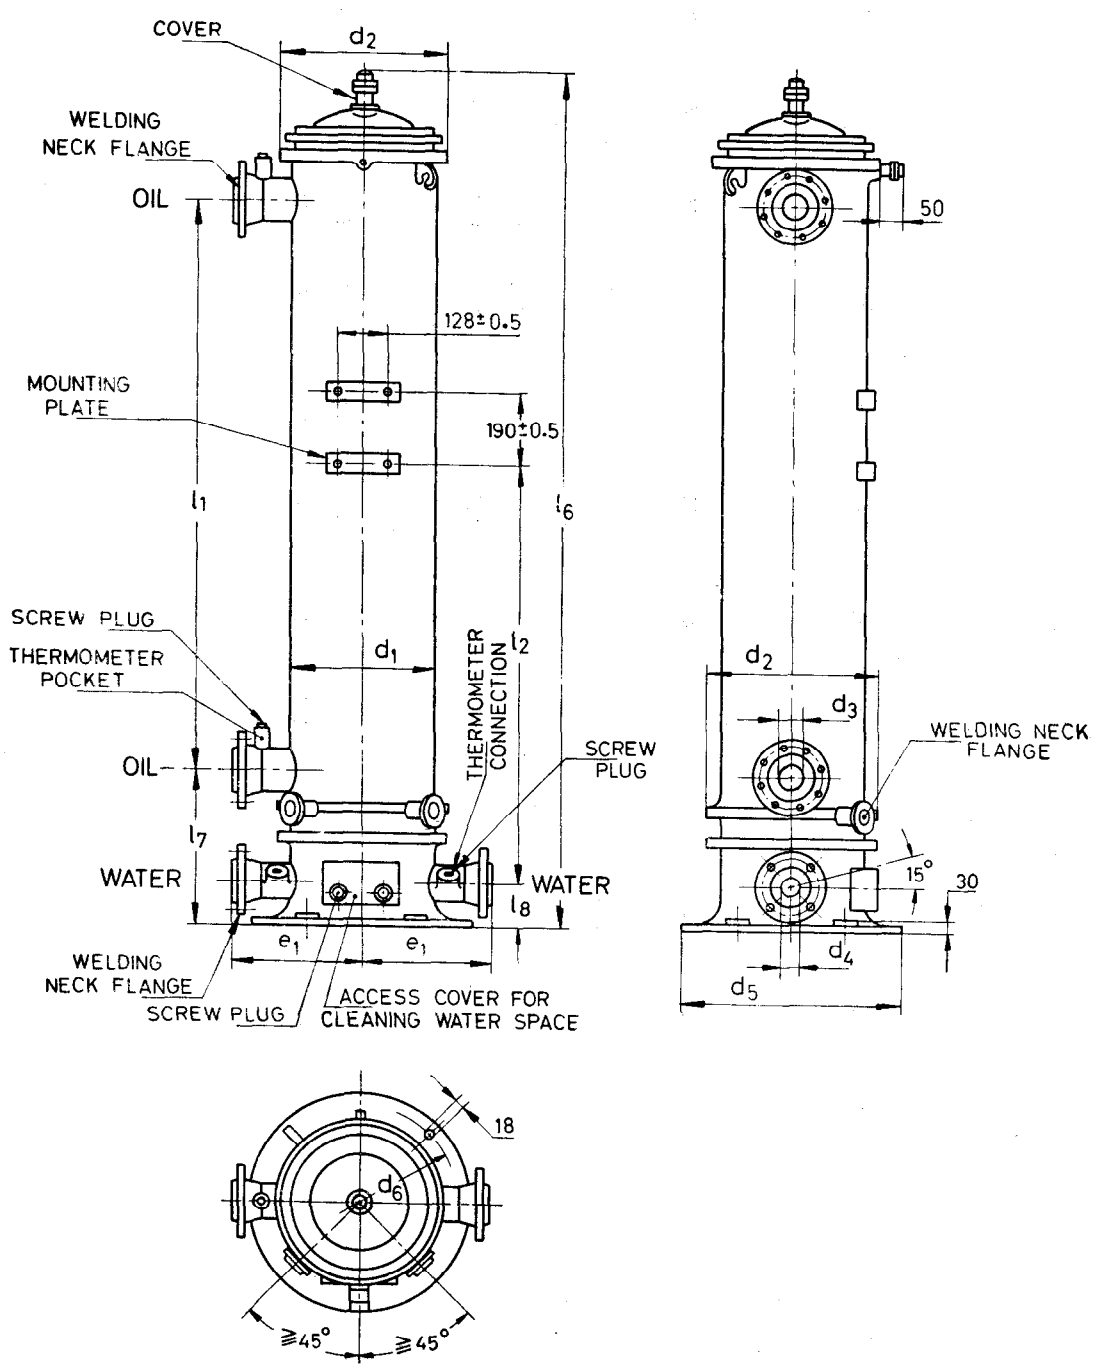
DIMENSIONS FOR SUSPENDED MOUNTED ( SM ) HEAT EXCHANGER
